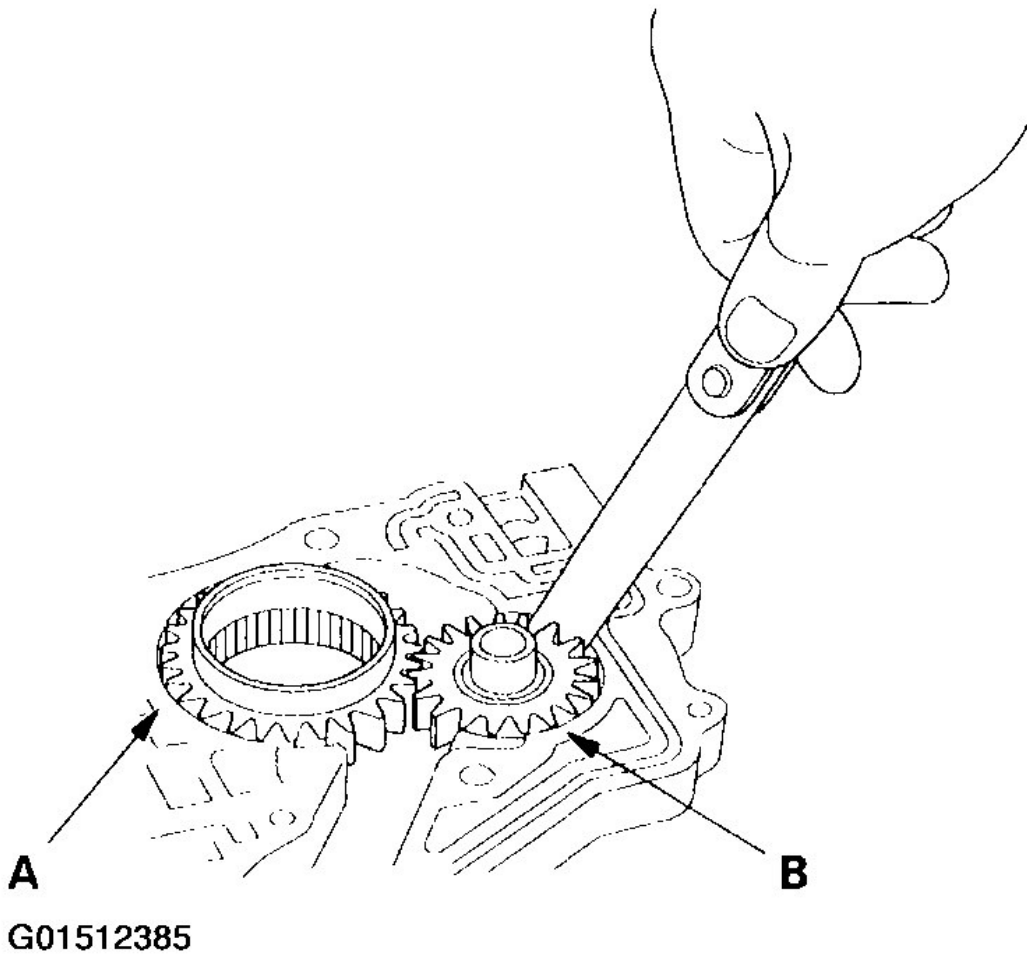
Measuring Side Clearance Of ATF Pump Drive Gear
